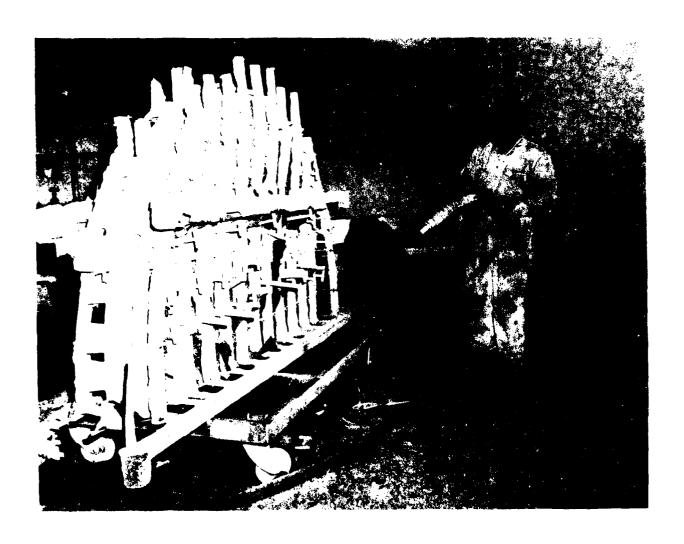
Grit Blasting Excess Sand from the Bulkhead Casting
